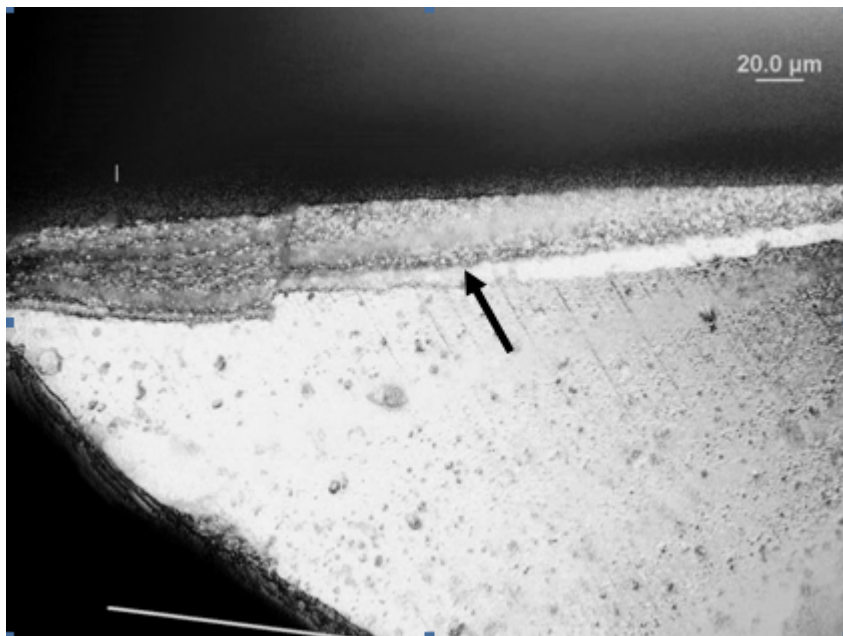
Optical microscope generated image of a chipped flank (shown by arrow) in a TiN coated end-mill (mist cooling/lubrication, machining time: 82s; cutting speed: 0.06m/min).
